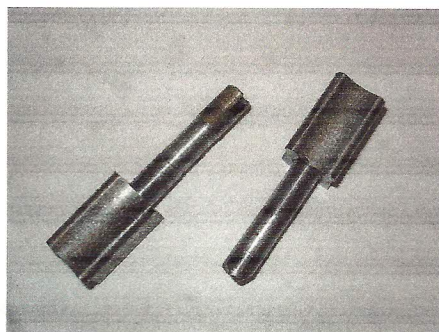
shows a typically worn shaft and also a shaft with severed drive tangs caused by this excessive wear.
